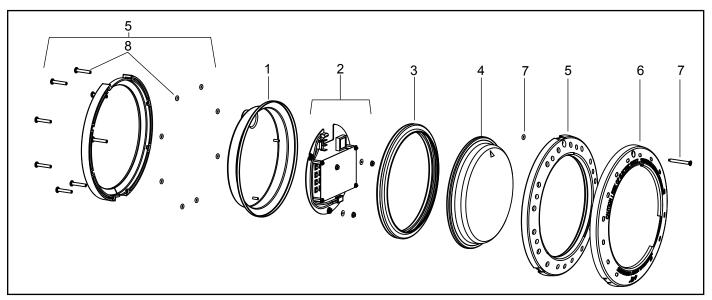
Jandy Pro Series Large WaterColors LED Light Exploded View
